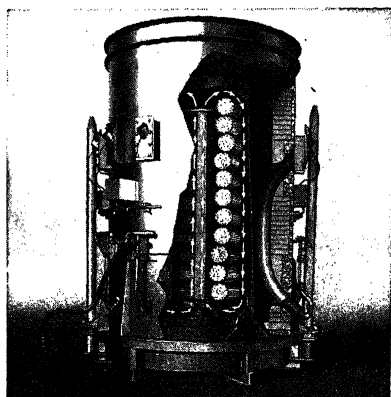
Cutaway section of Wilson hood furnace showing circulating fan.
